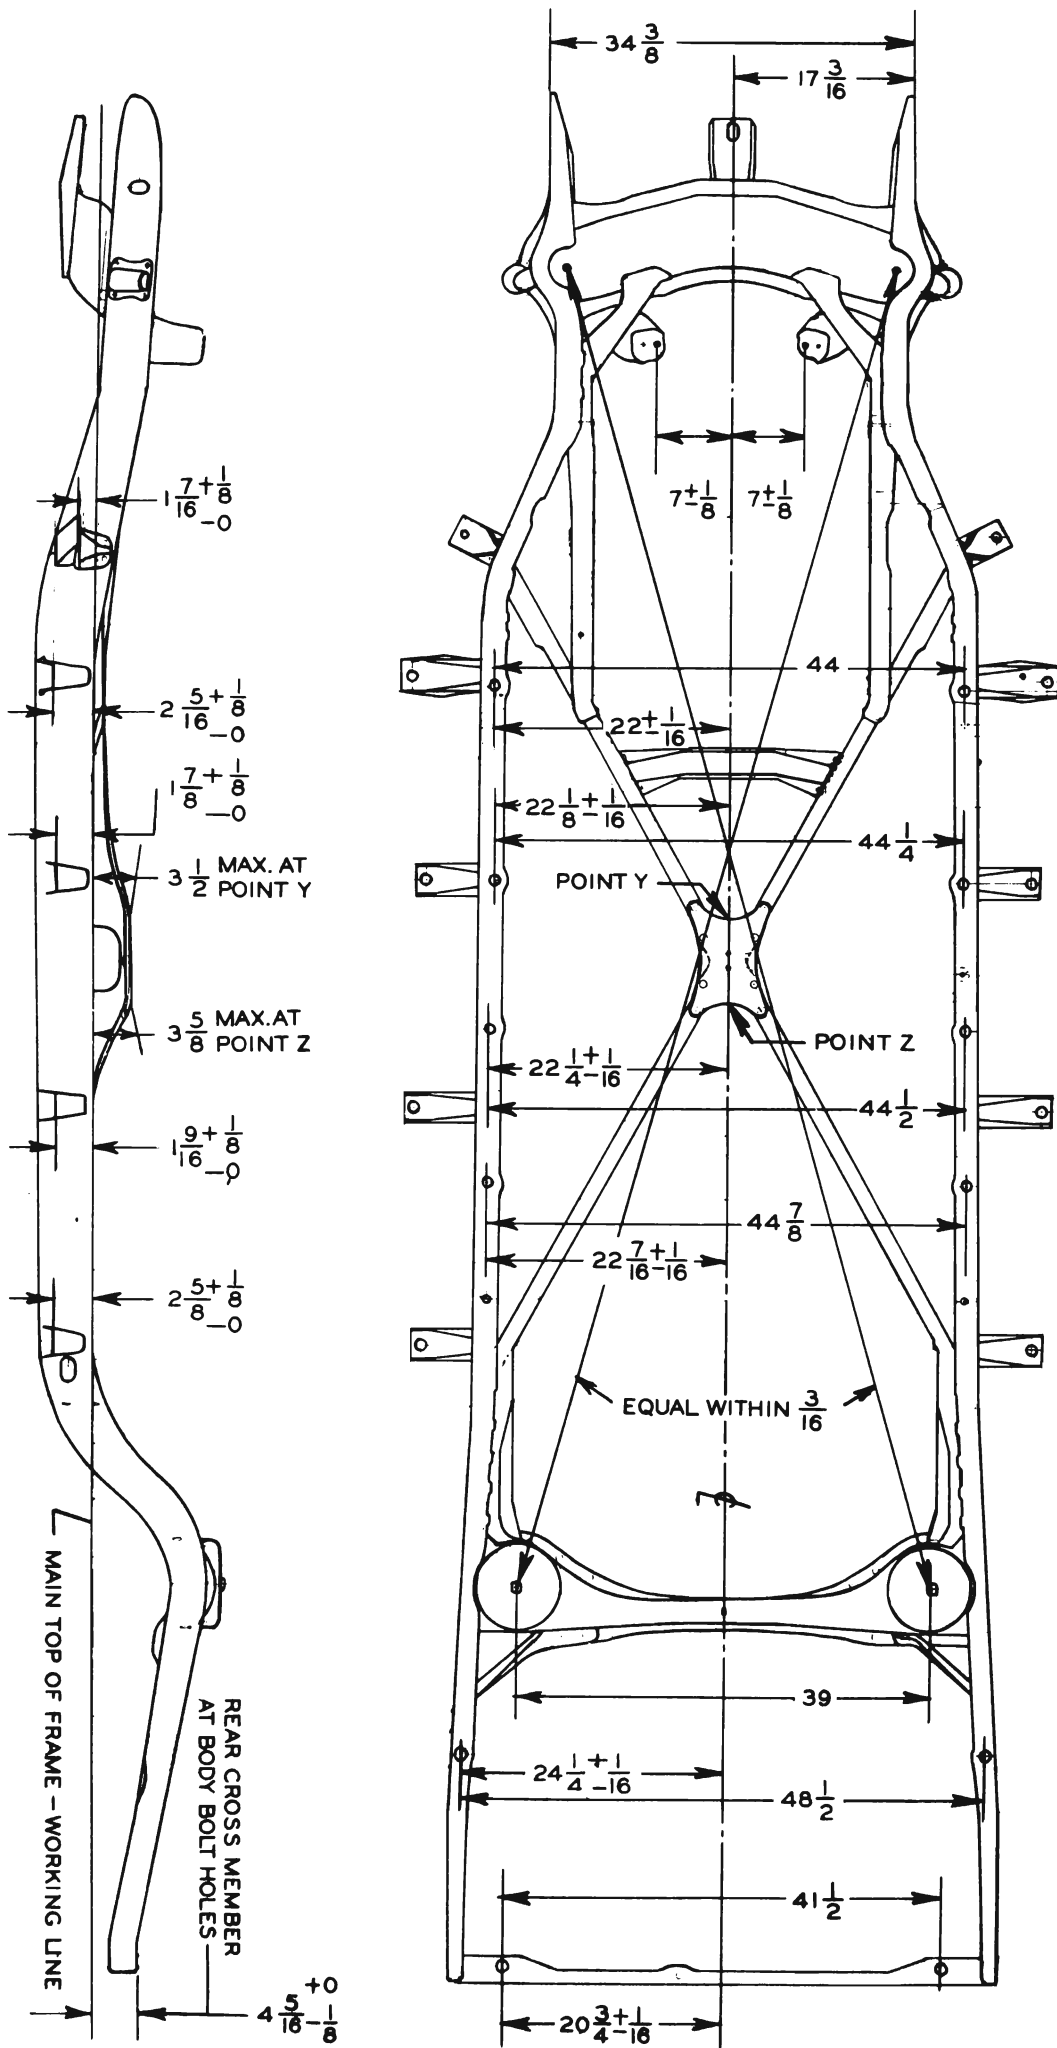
Frame Checking Dimensions—1949 Series 50
